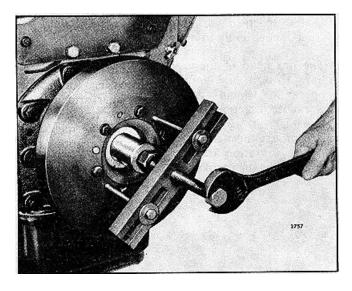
Removing Vibration Damper Outer Cone from a 12V Engine
